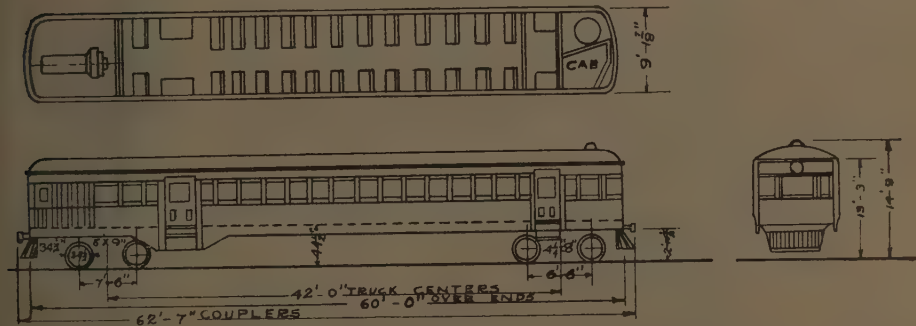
Gas-electric passenger motor car No. 91, Louisville and Nashville Railroad Company.
